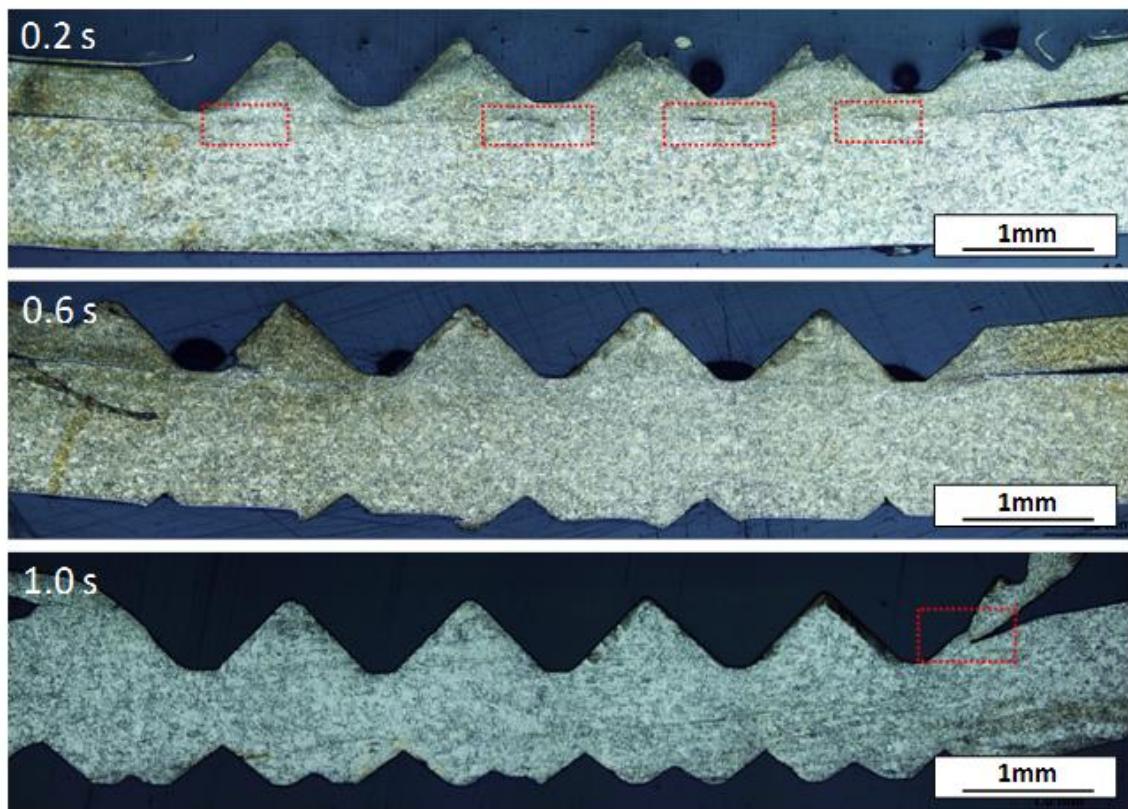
Optical images of Cu and Ni-plated Cu weld cross-sections produced with a pressure of 50psi, with increasing welding times (0.2s, 0.6s, and 1.0s)
